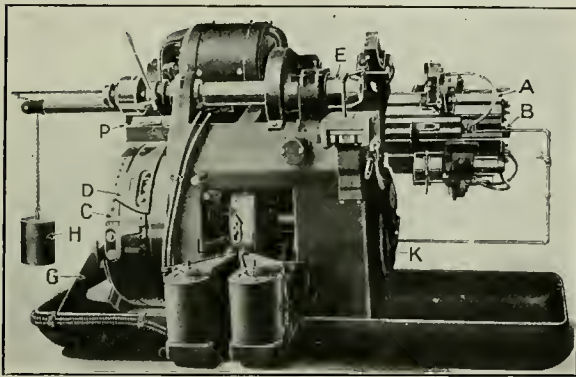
Typical Single Spindle Automatic Turret Lathe
